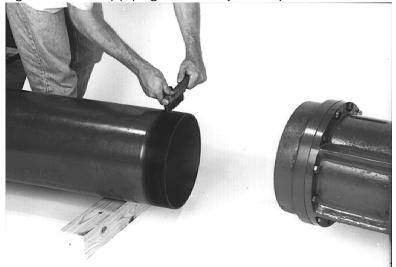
Applying thread locking fluid to column pipe threads
